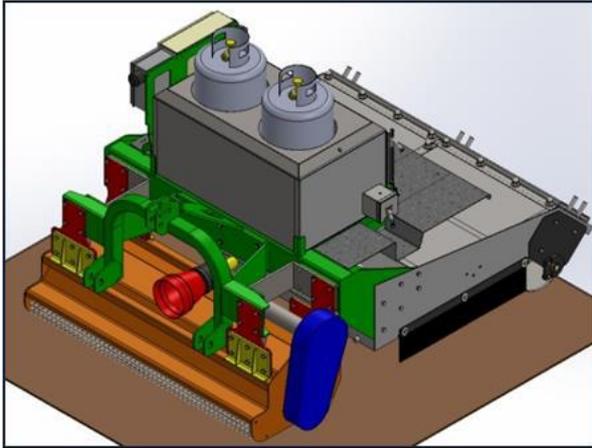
CAD images of the combined assembly Figure 2: CAD schematic of the bolted linkage
